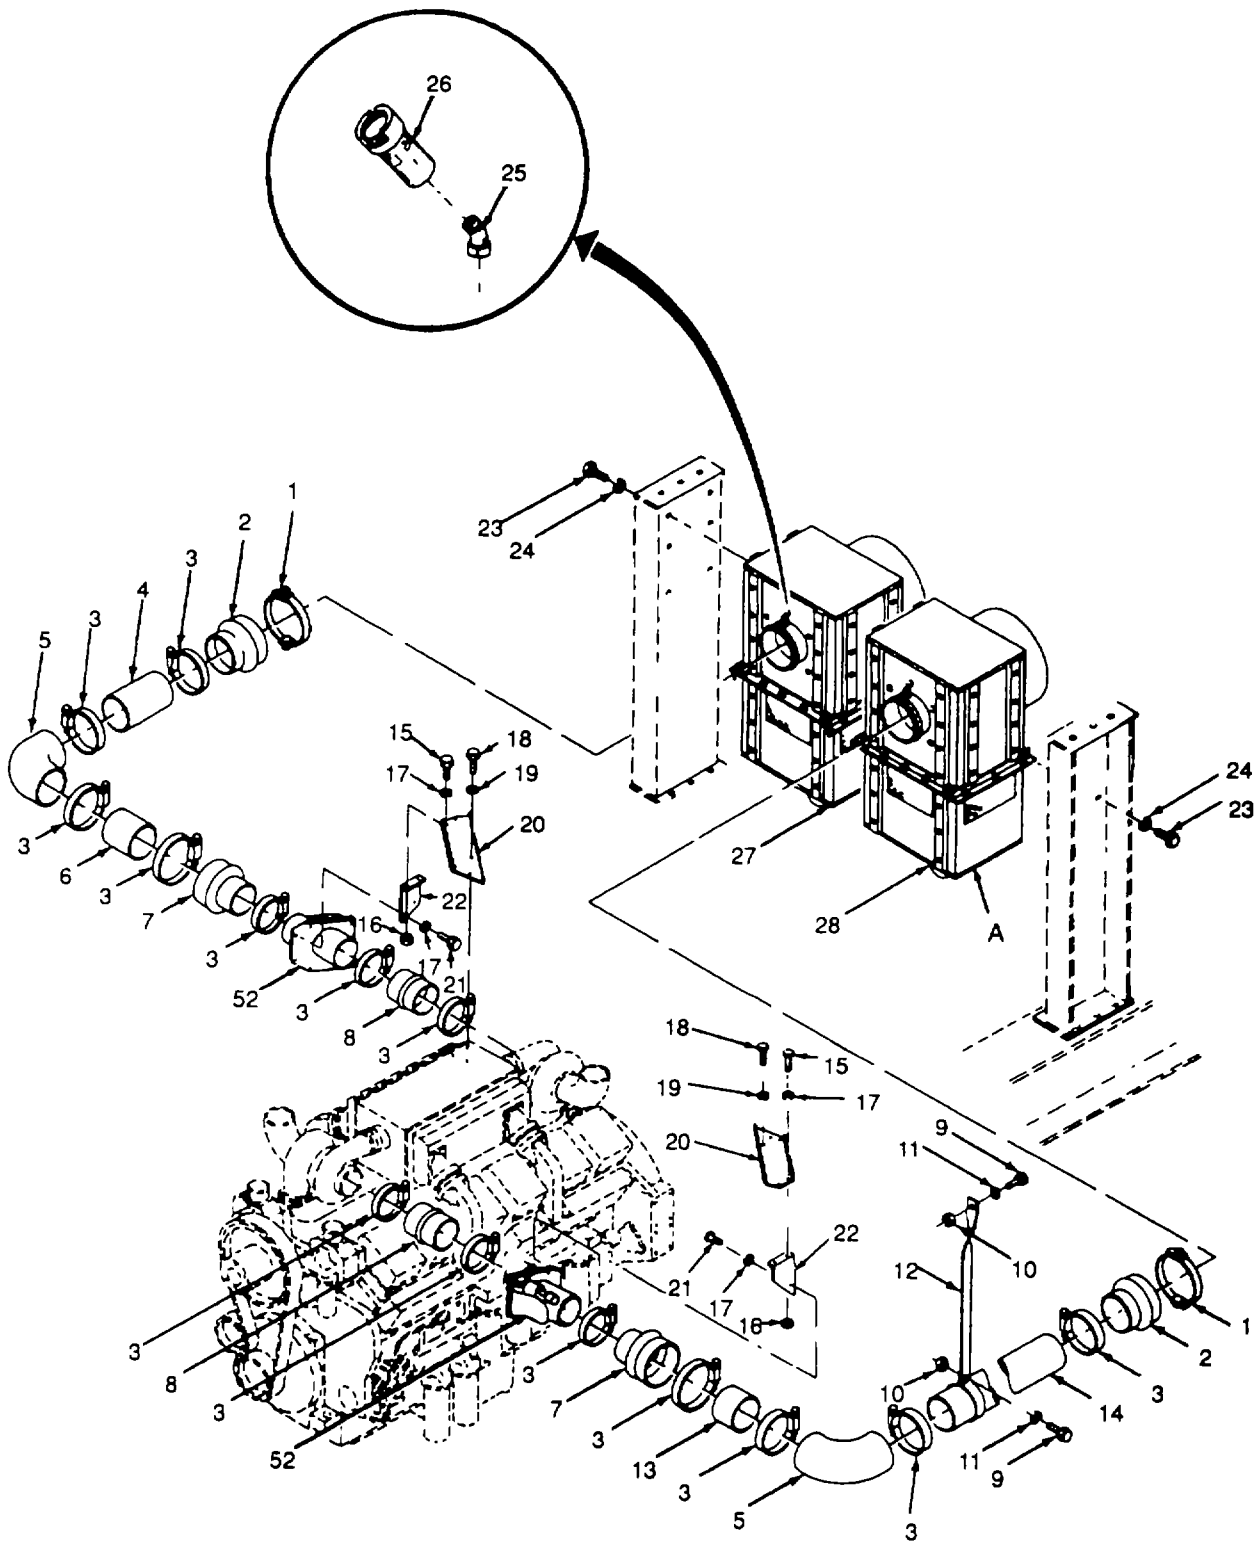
Air Cleaner and Related Parts (Sheet 1 of 3)
